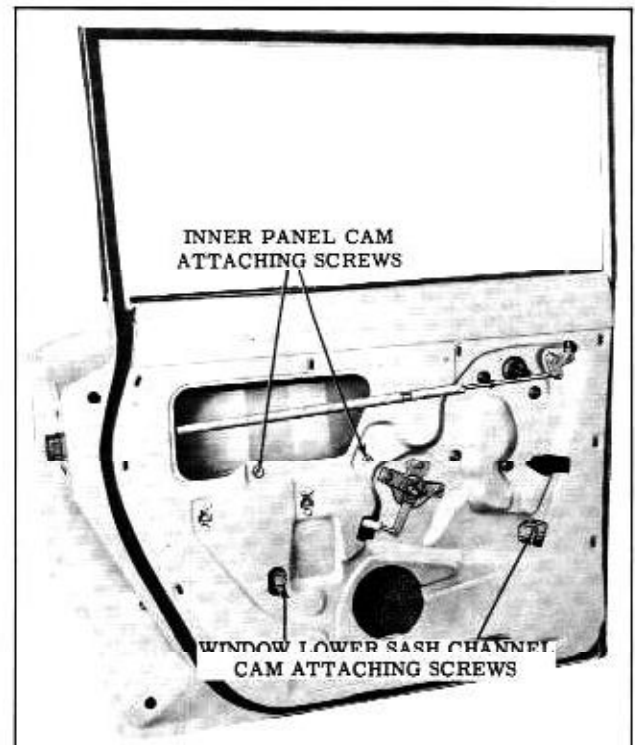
Inner Panel Cam and Window Lower Sash Channel Cam Attachment
